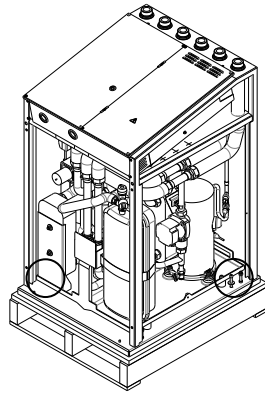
Removing the screws fastening the heat pump to the pallet.
